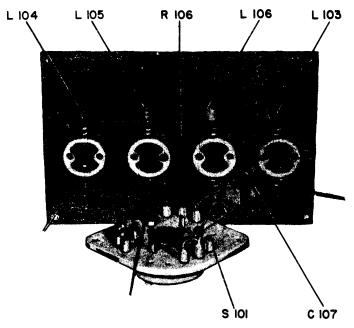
Transmitter Exciter Plate-Tank Assembly - Top View
